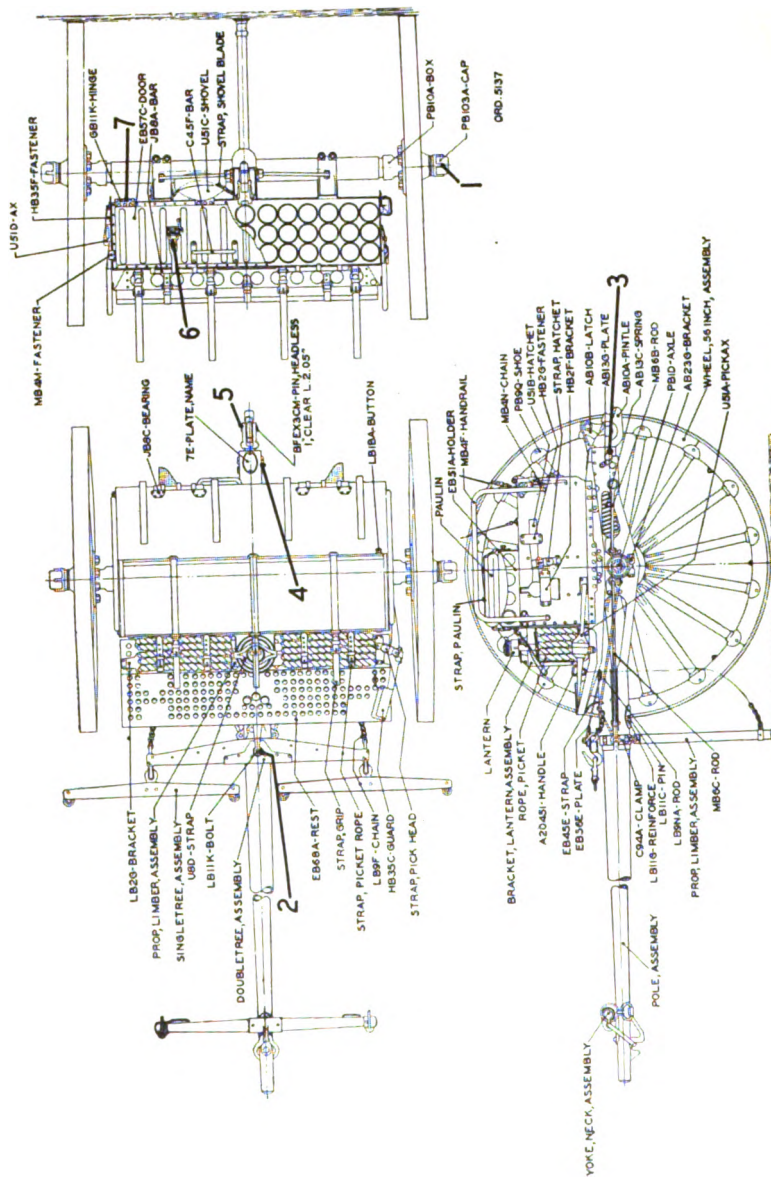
75-mm gun caisson limber, M1918, assembled views
